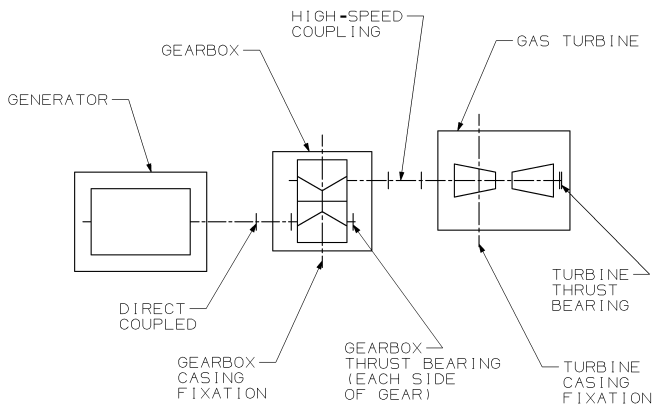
Layout of Gas Turbine, Gear, Generator Train of Example 4.
